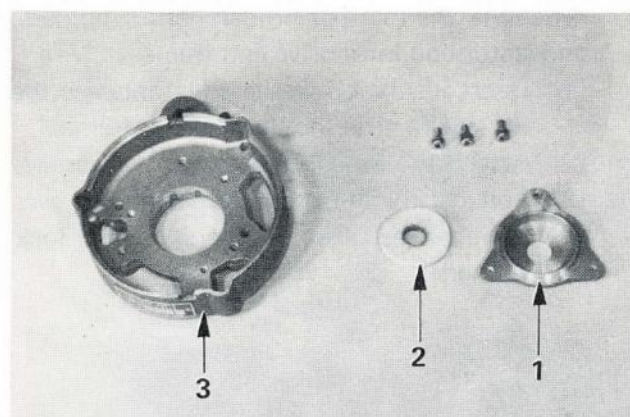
Felt Washer & Rear End Frame Inspection
